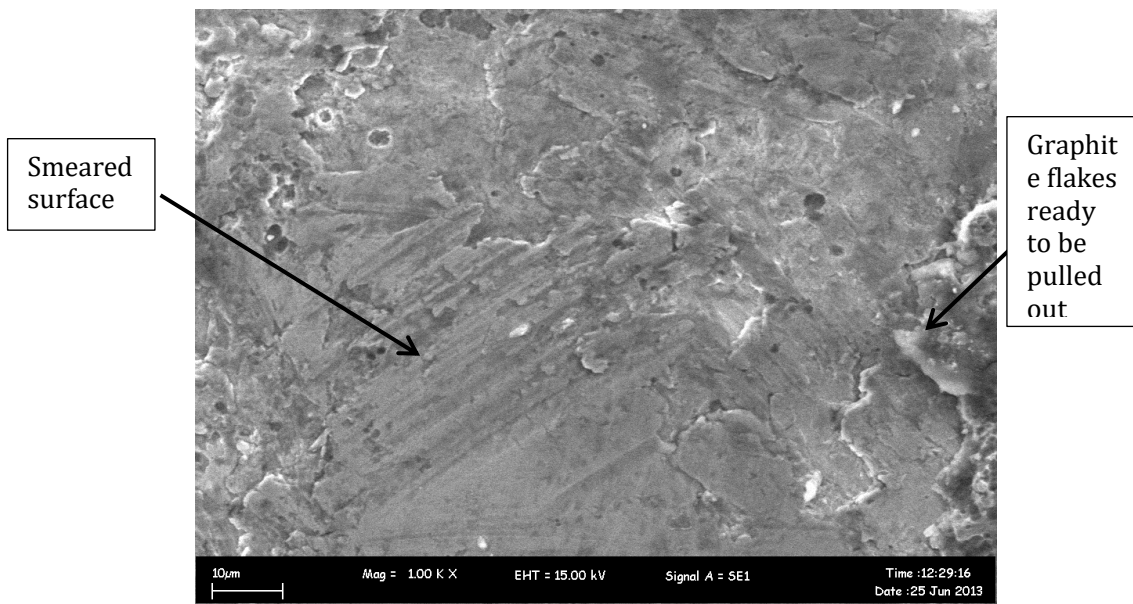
Surface appearance at lower cutting speed of 99 m/min.
